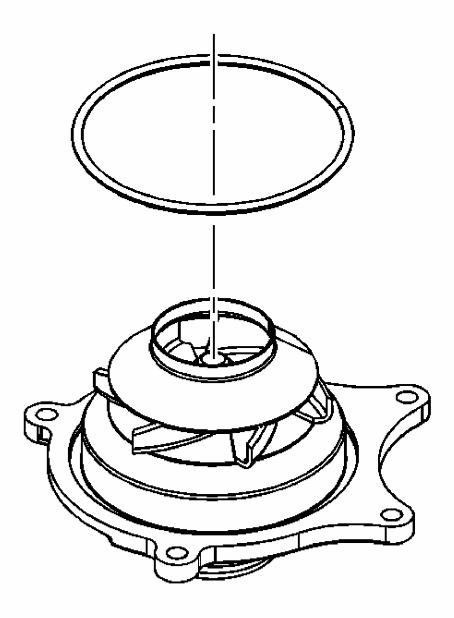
Identifying Water Pump O-Ring Seal Courtesy of GENERAL MOTORS CORP.
